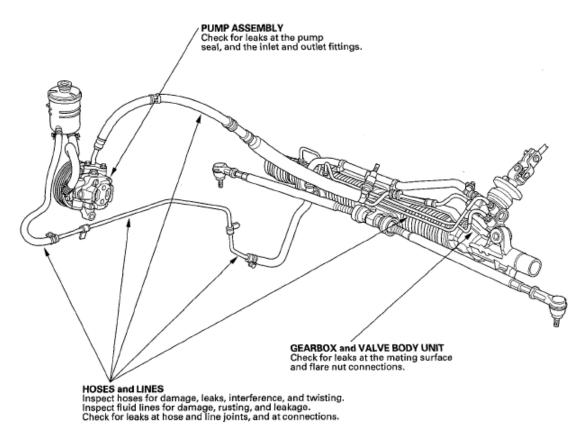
Identifying Power Steering Fluid Leakage Parts Location Courtesy of AMERICAN HONDA MOTOR CO., INC.
